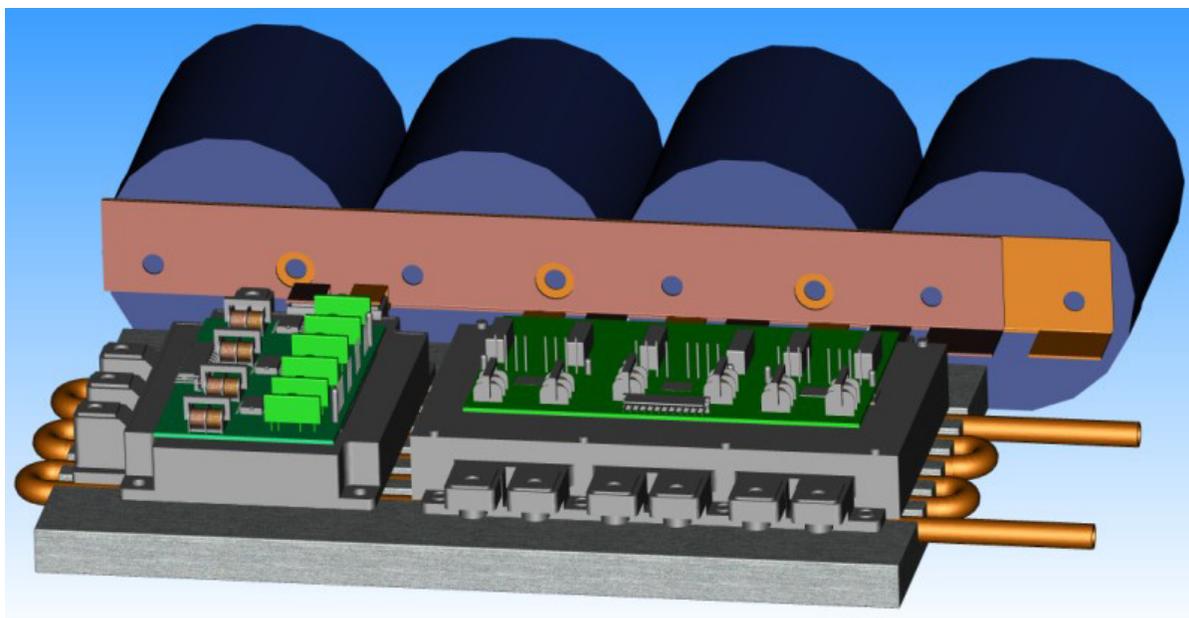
A 3-D drawing of a 55-kW inverter layout design with plug-in charging capability. Heat sink footprint: 12 in. W \times 7 in. D.
